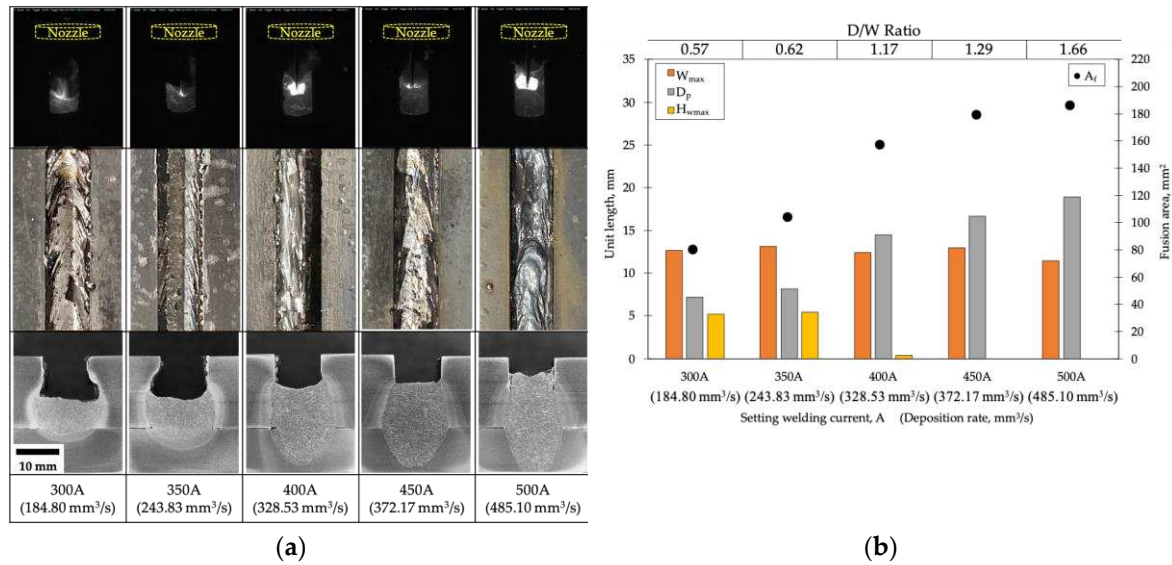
Effects of the welding current for a 10-mm gap and a travel speed of 30-cm/min: (a) arc behavior, weld bead appearance, and cross-sectional analysis and (b) weld profile measurement.
